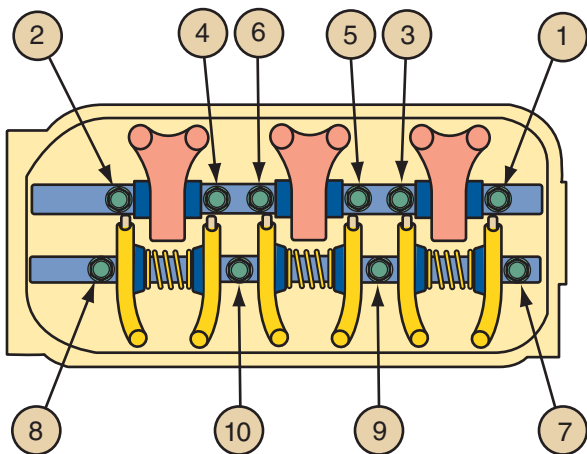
Rocker arm assemblies should always be removed by following the prescribed order for loosening the mounting bolts.
